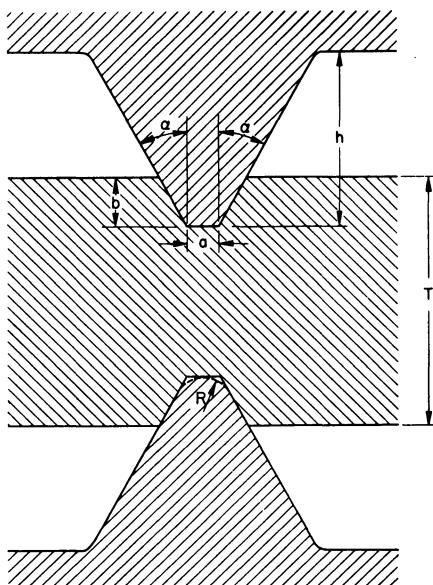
Dimensions of knife edges (Table 3.39)
